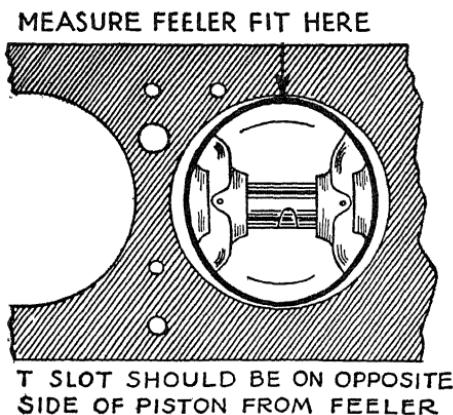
Fitting Buick Pistons with Feeler Gauge
